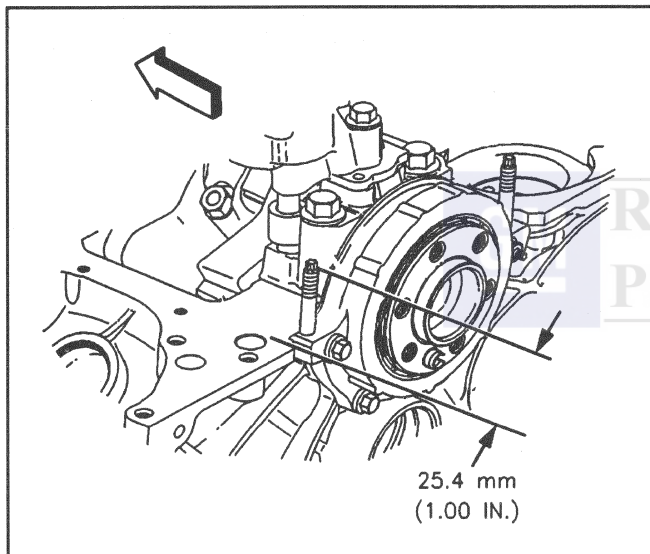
Applying Sealant to Rear of Engine Oil Pan Surface
